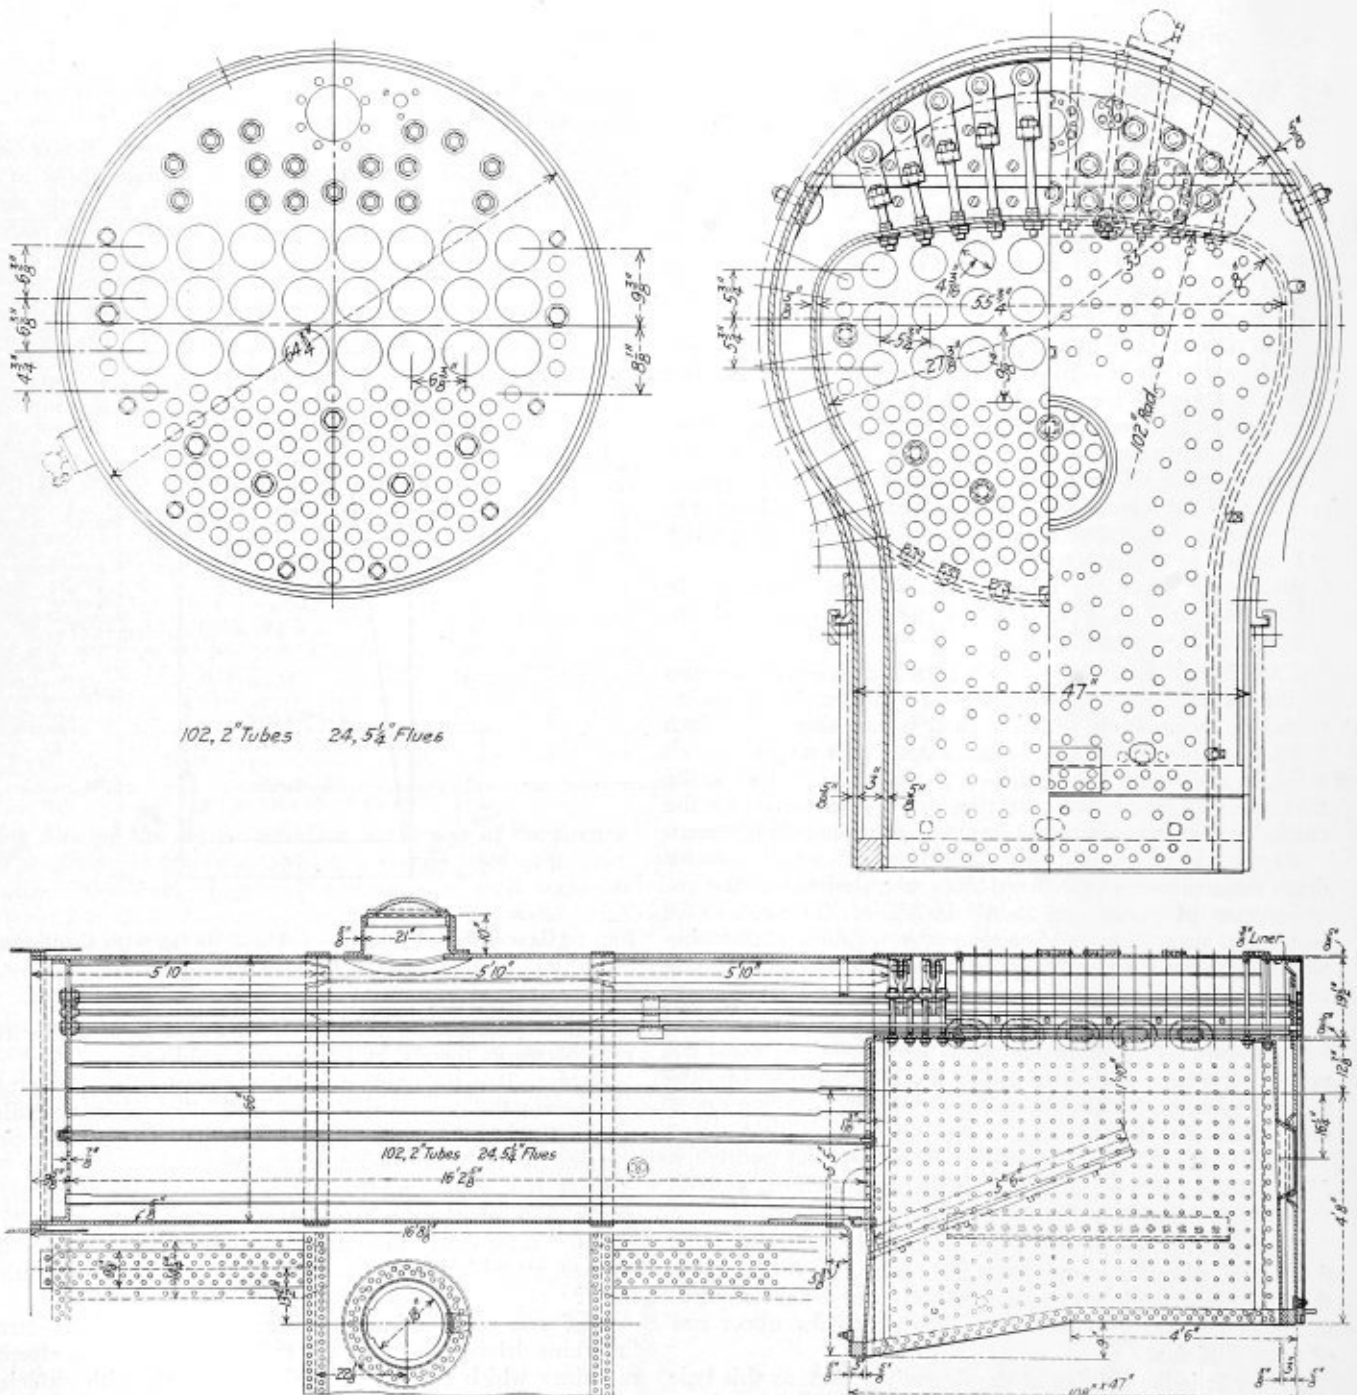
Boiler Details of the 0-8-0 Locomotives Built for the North Eastern
